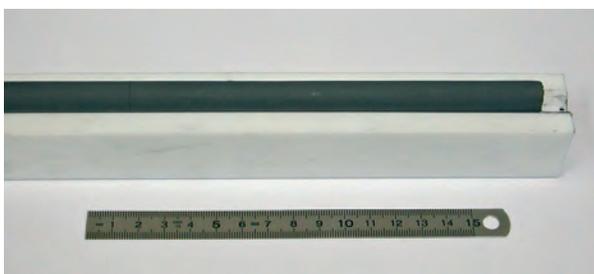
View of a tungsten carbide rod, fabricated by extrusion.
